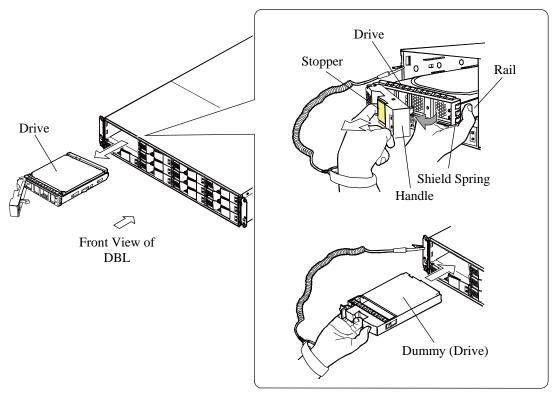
Removal of Drive (for DBL)
